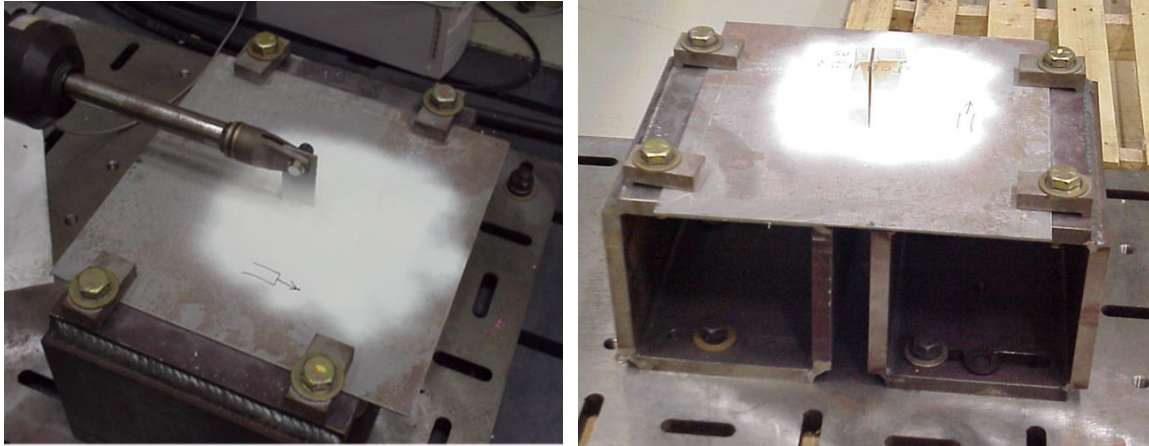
Welded specimen and the fatigue test setup arrangement - gusset weld joint with non-symmetric welds
